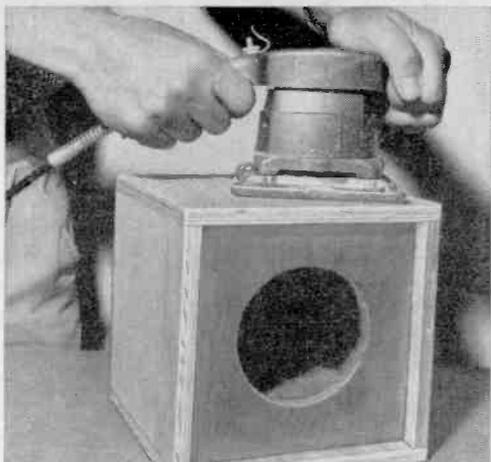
Power sander is fast way of smoothing surfaces, but you can use wood block and sandpaper.
